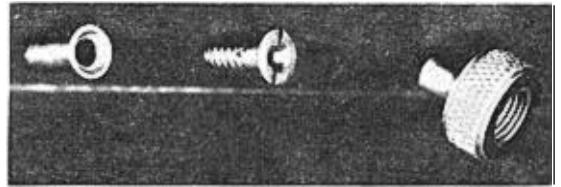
Special nozzle disassembled, consisting of a threaded holder, modified brass wood screw, and hollow-aperture shell.
